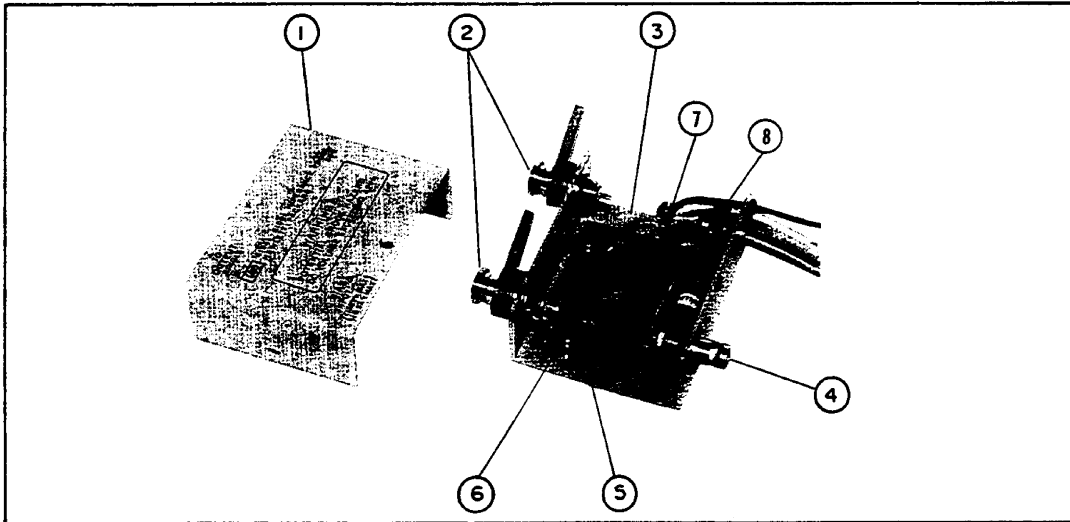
Disassembled Probe Assembly (Connection Box)
